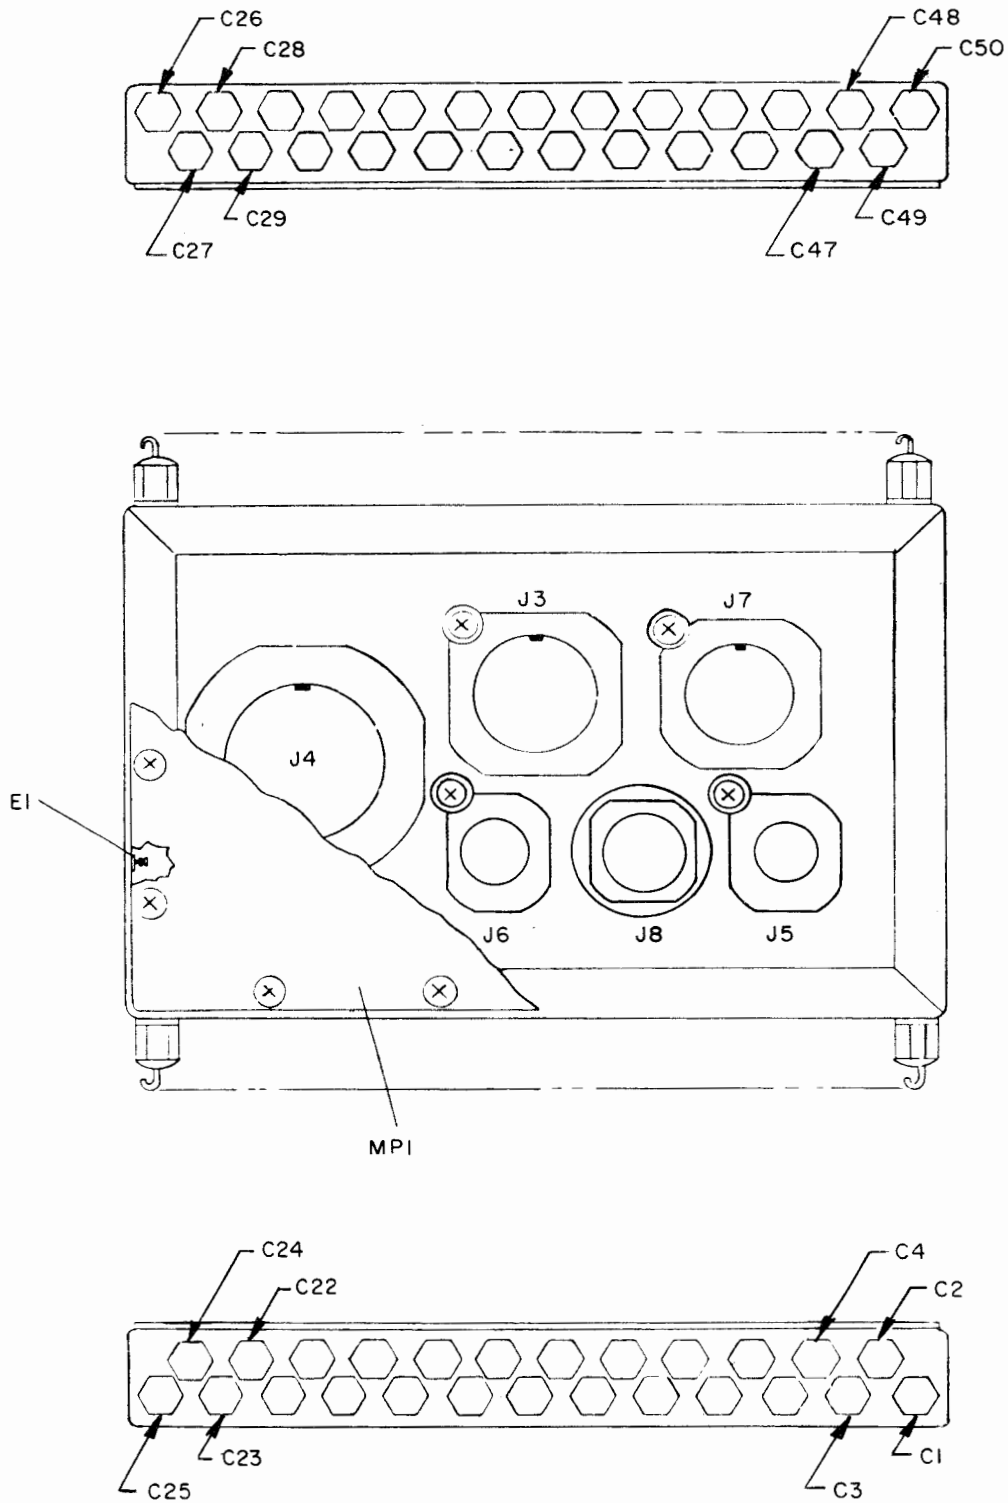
Filter Box Assembly A1A1, Component Locations
